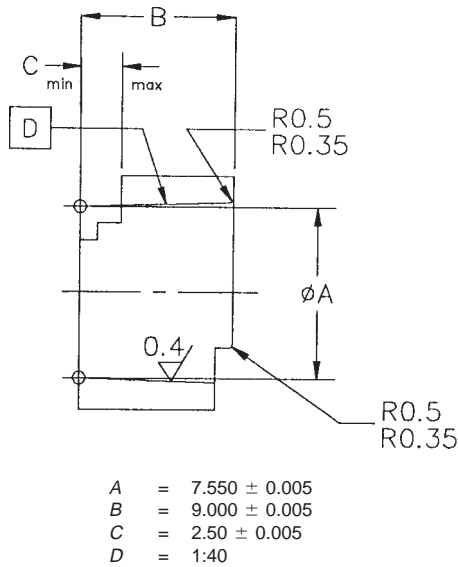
Temperature Sensor Engaged with Ring Gauge
